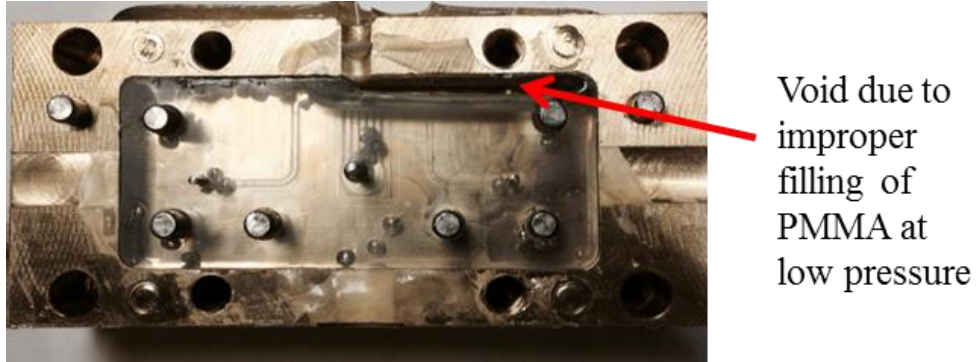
Casting at lower pressures caused voids to occur because the resin could not fill the mold cavity.
